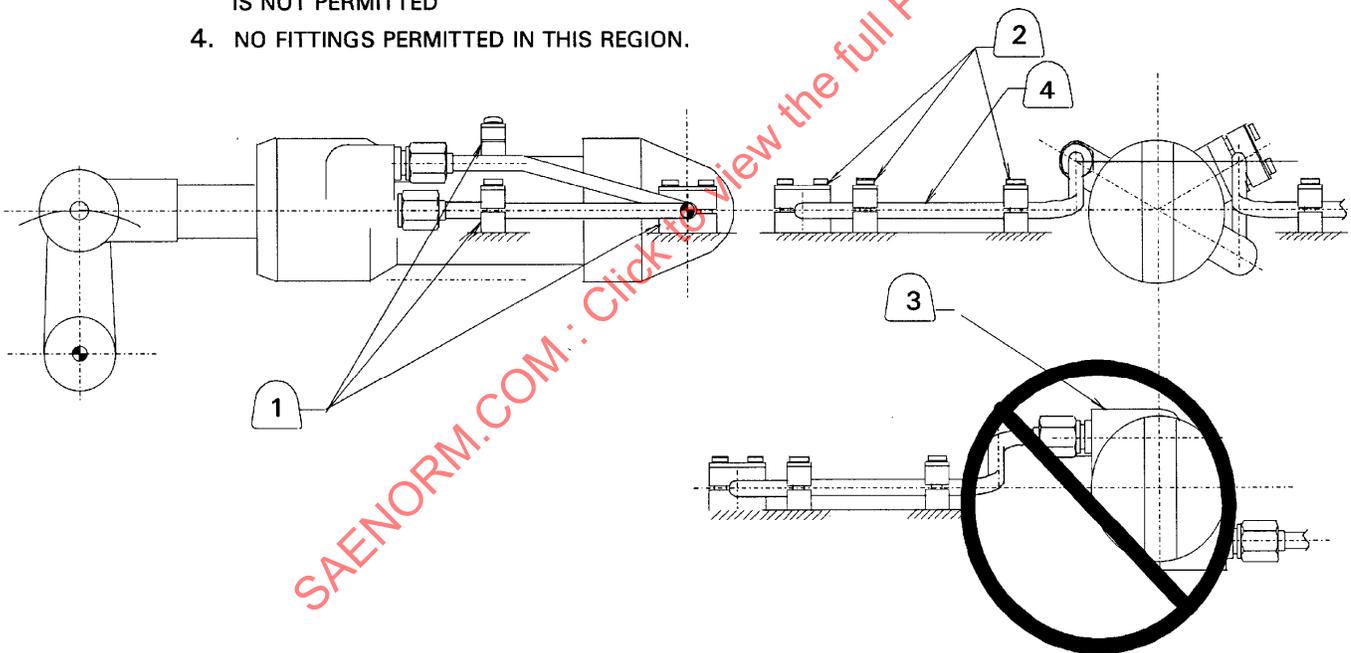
STYLE B - TORSION TUBE CONFIGURATION
